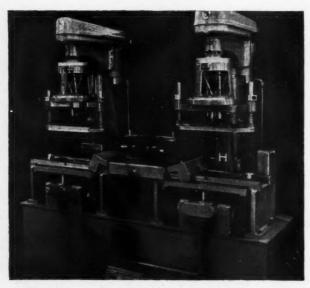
Two S.P.K. machines are here shown mounted on a cabinet base and set up for drilling and tapping holes in a cylinder head for an air compressor. The right-hand machine has been modified to provide leadscrew control for tapping operations
